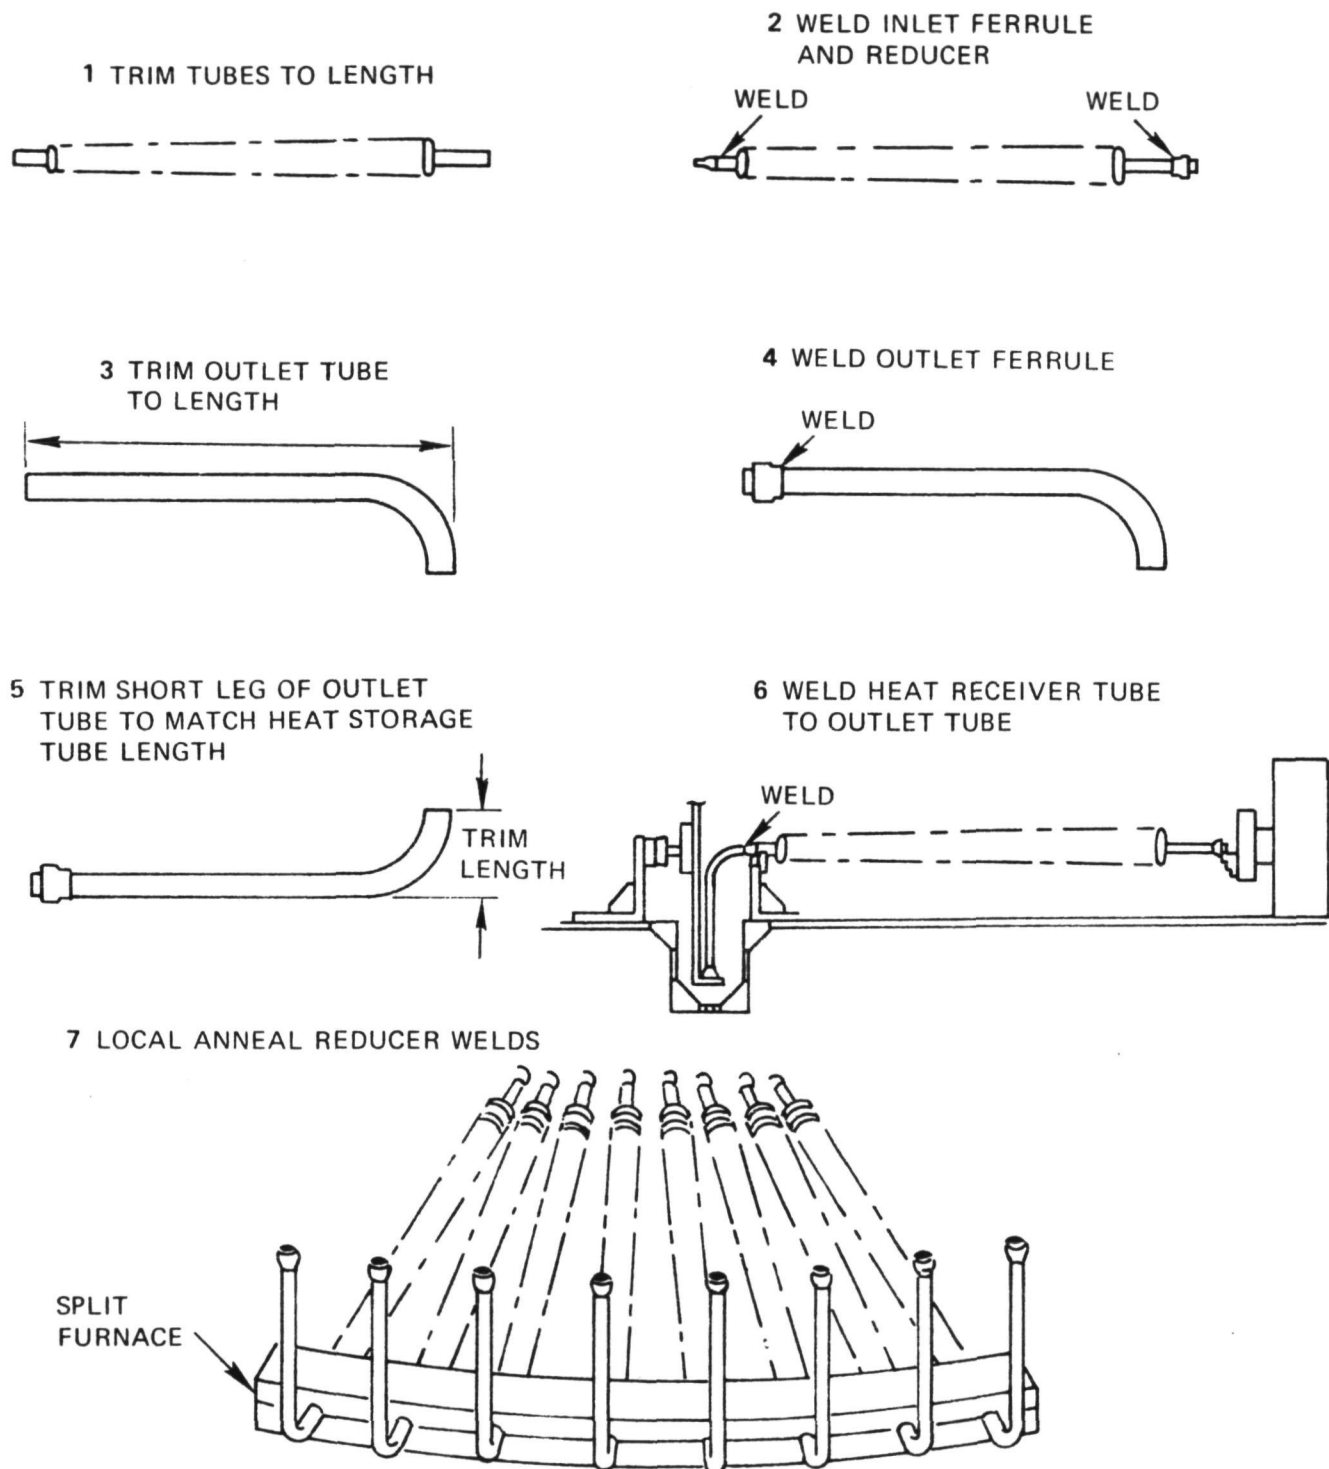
Heat Storage Tube Weld Sequence.
